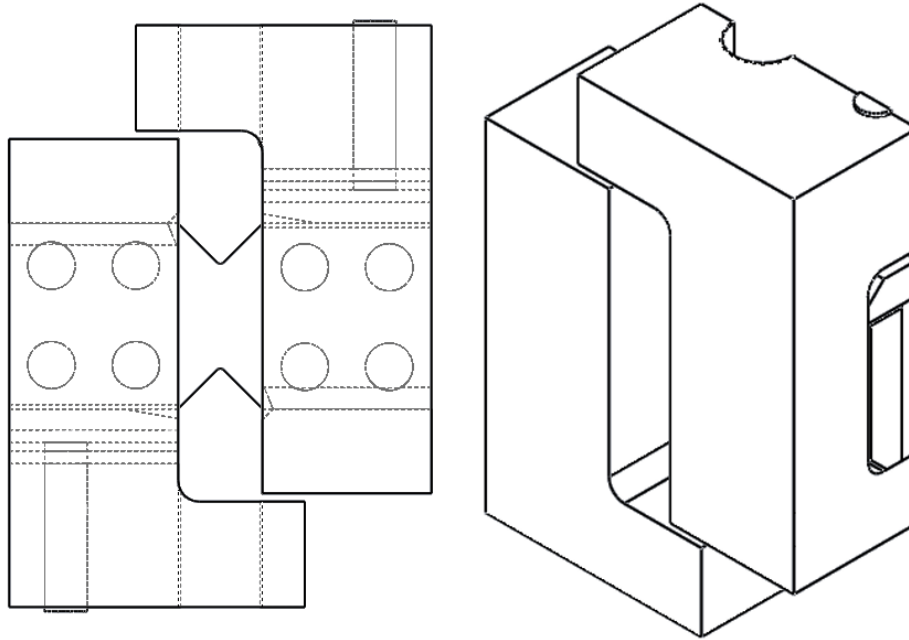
Depiction of the solid model used in the numerical simulations. Left: Front view of the fixture and test specimen with hidden edges shown. Right: Isometric view of the fixture.
